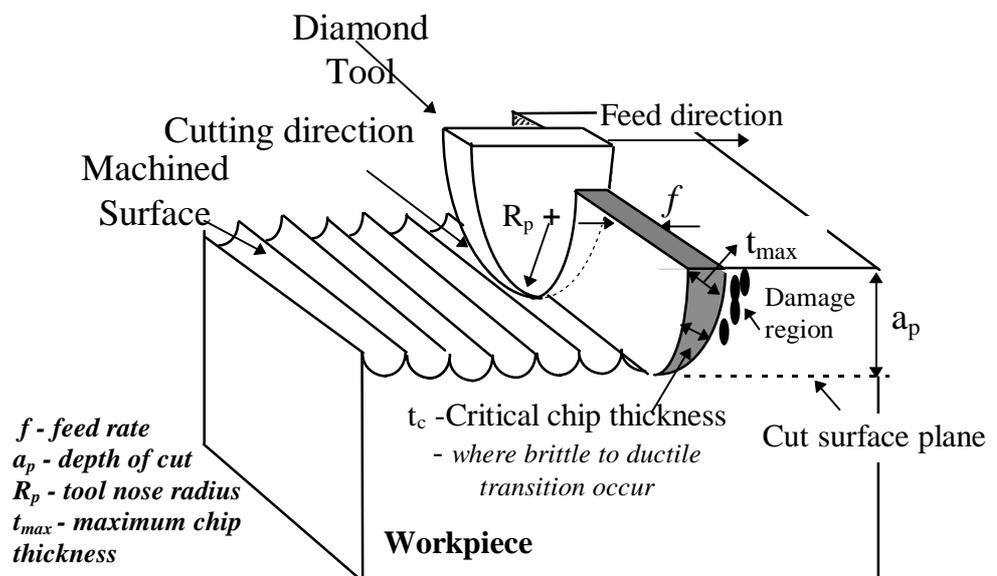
Schematic diagram illustrating machining geometry with round nose tool.
